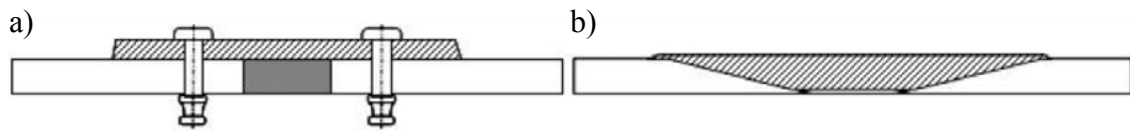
a) Bolted patch repair, b) straight scarf adhesively bonded repair [3]
